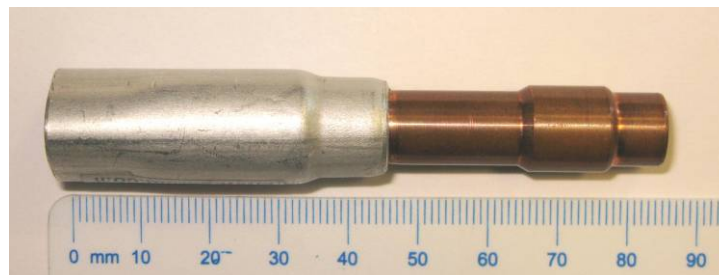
Photograph of the magnetic pulse weld component, mm scale shown.
